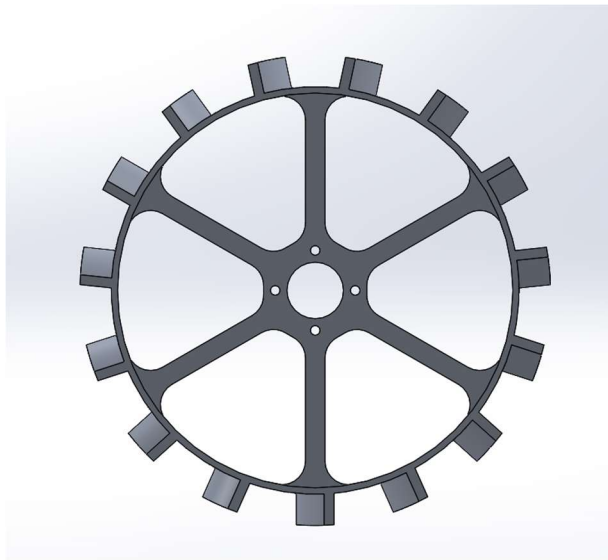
A head-on view of the wheel CAD model to show the inner hub and support details.
